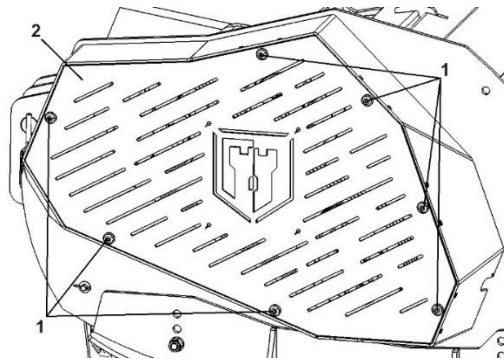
Adjusting the belt drive tension: 1 – fastening bolts, 2 – belt drive guard
